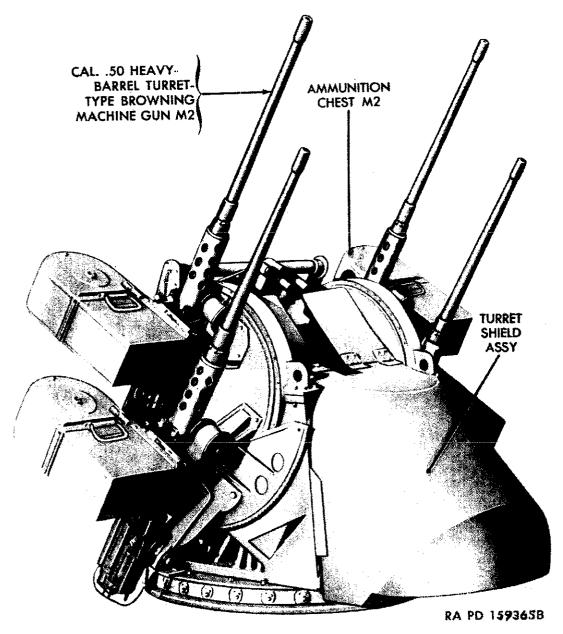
Multiple cal. 50 machine gun mount M45C-right-front view.
